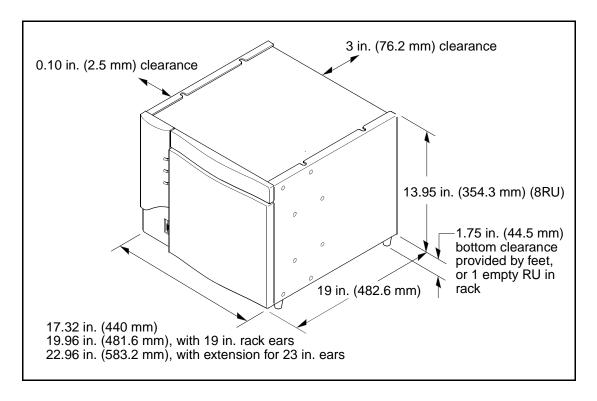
Chassis Dimensions and Clearance Requirements
